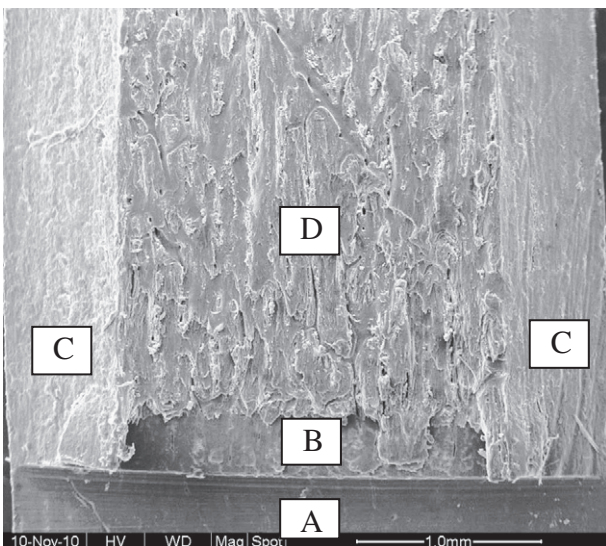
Fracture surface: A – initial notch; B – pre-crack using a blade; C – lateral grooves; D – mode II fracture surface.
